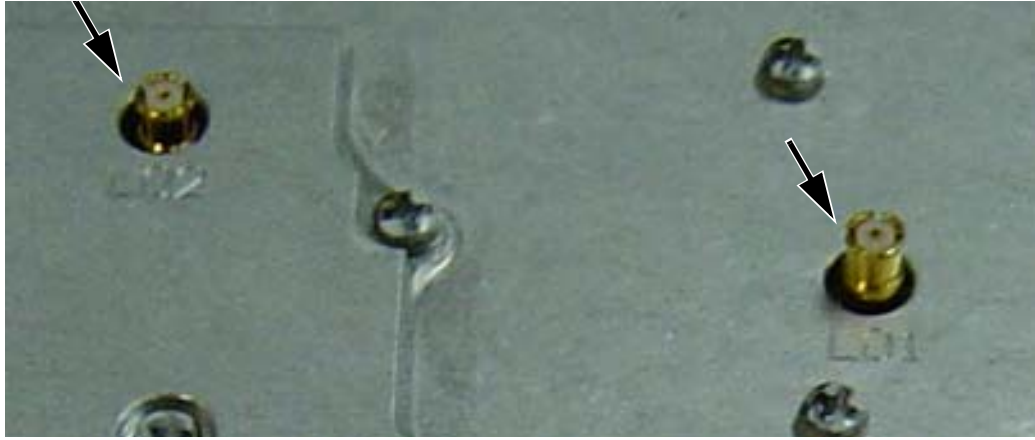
SMP Connectors in SPA PCB LO1 and LO2
